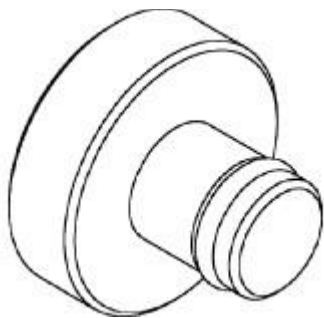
Crankshaft Damper Removal Insert - 8513A
